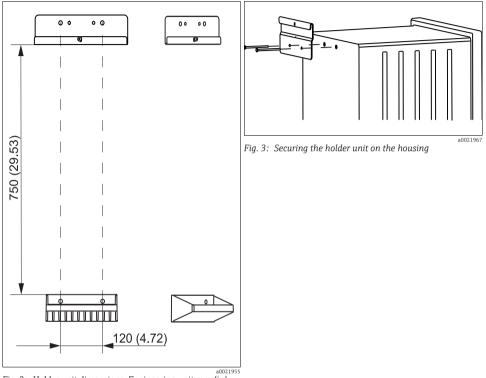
Holder unit dimensions. Engineering unit mm (in).
